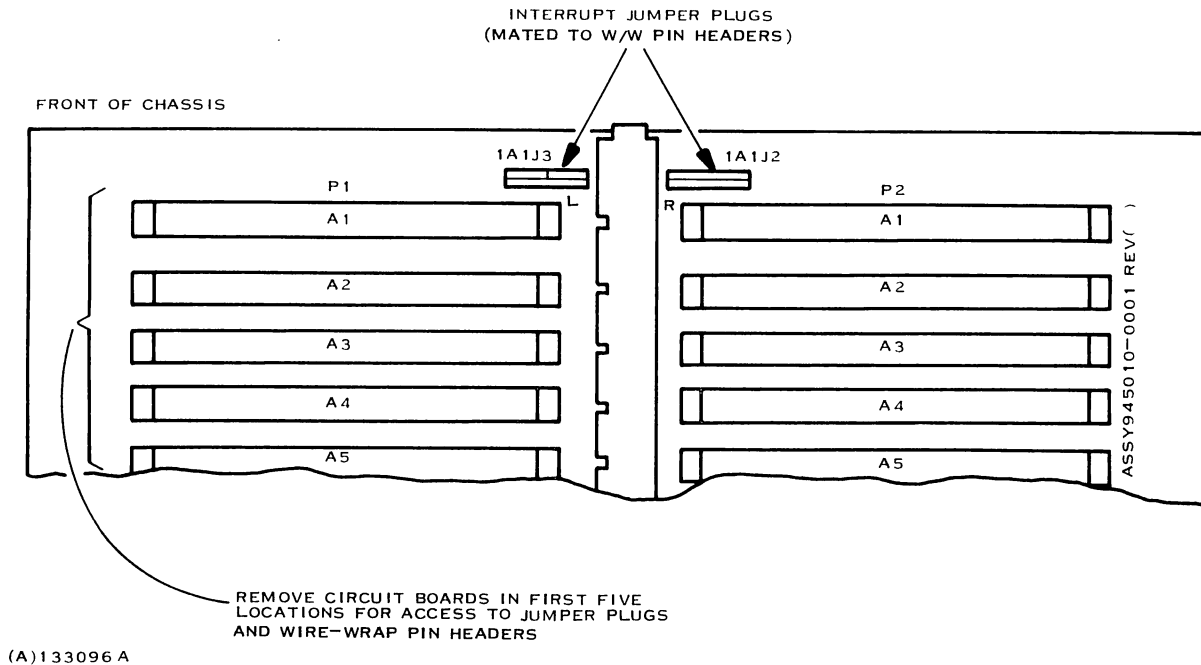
Location of Interrupt Jumpers (6- and 13-Slot Chassis)
